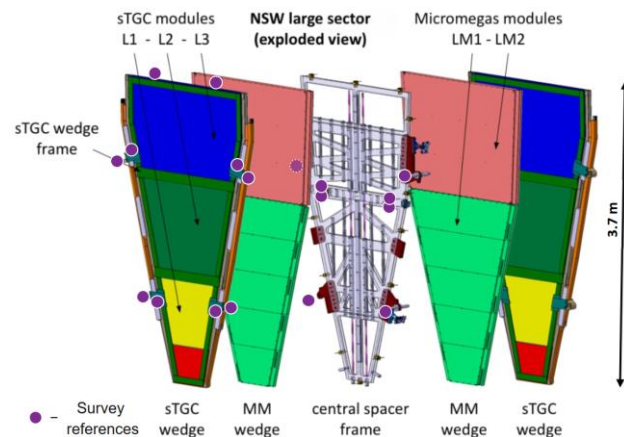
Exploded view of NSW Large sector Double Wedge with the spacer frame, MM chambers and sTGC.
